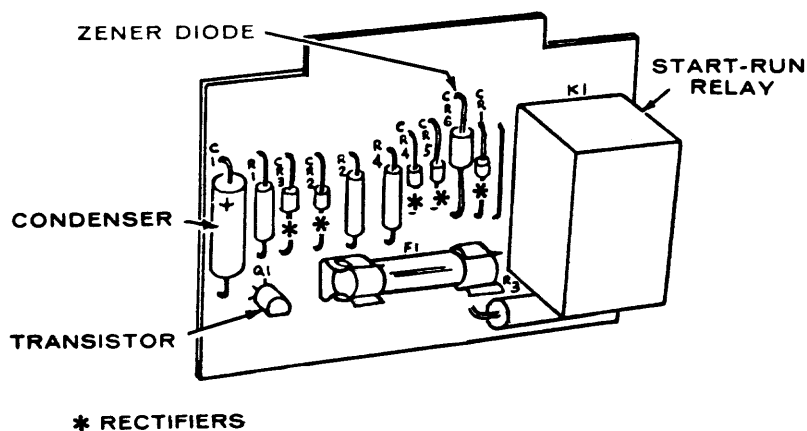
300-0741 PRINTED CIRCUIT BOARD
